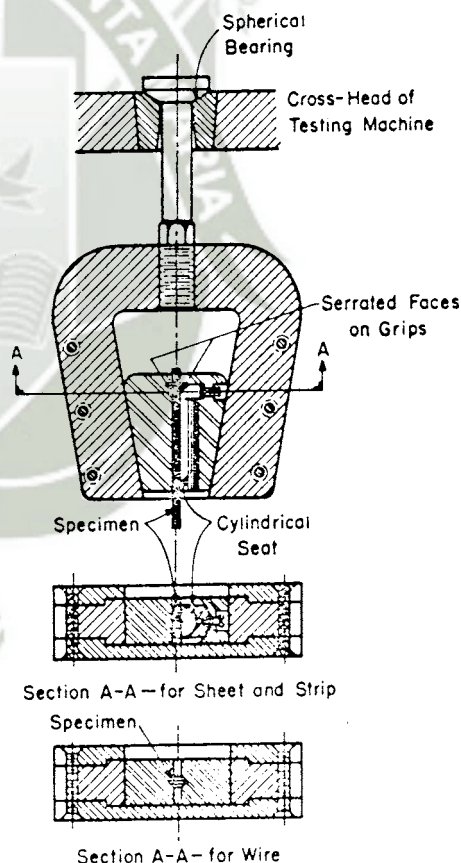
Gripping Devices for Sheet and Wire Specimens
